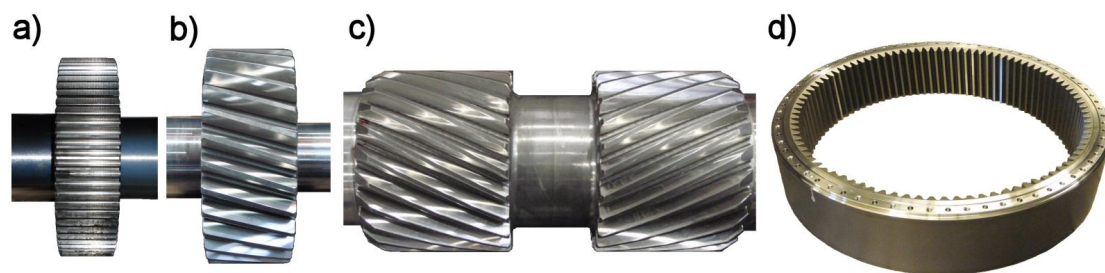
a) Spur, b) helical, c) herringbone and d) internal gears.
